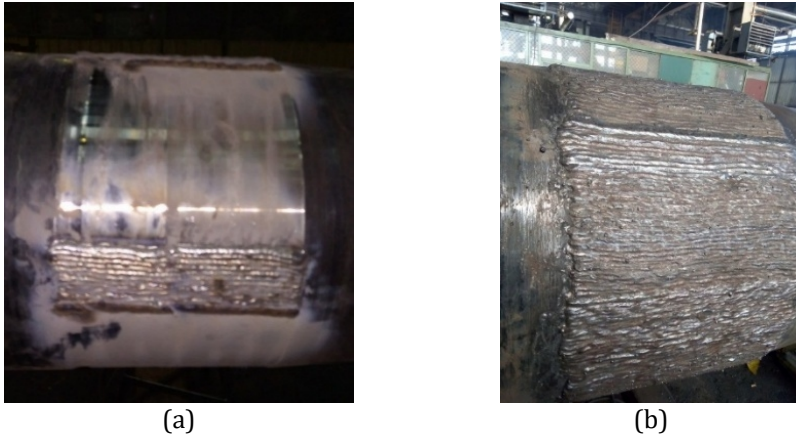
Repair welding of KU 300 excavator wheel shaft; a - Machined surface in the zone of abrasive damage, b - Completed weld
